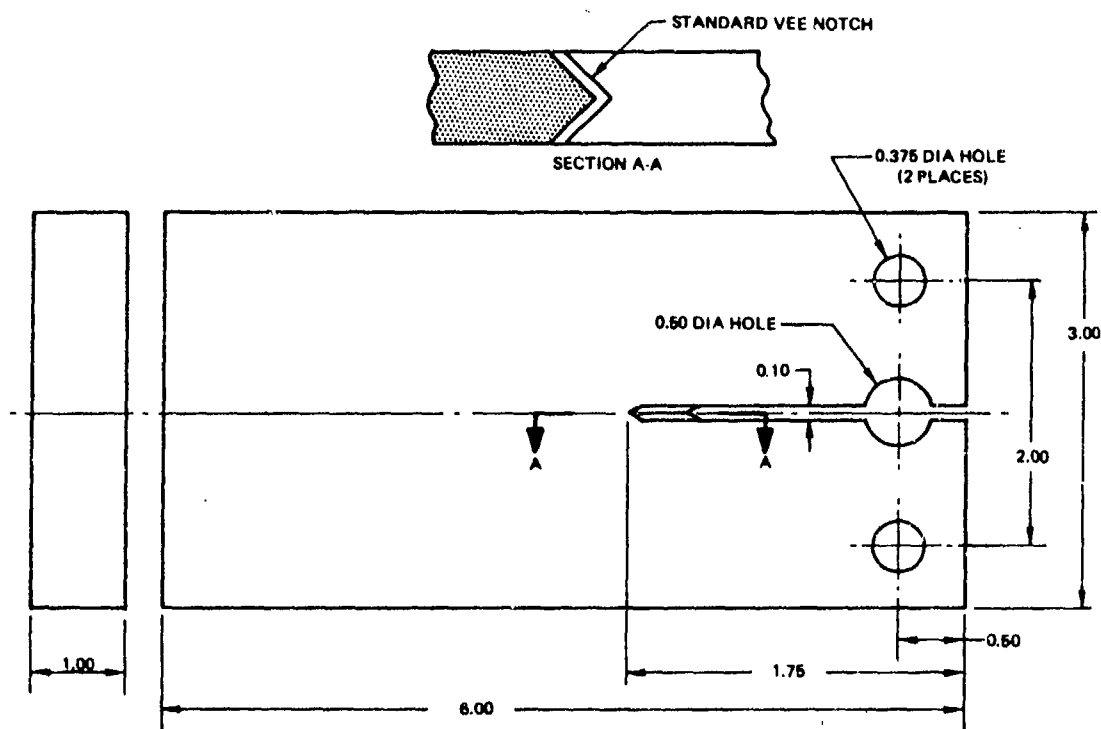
DCB Specimen Configuration Used For Stress Corrosion Testing (Titanium Alloys)
